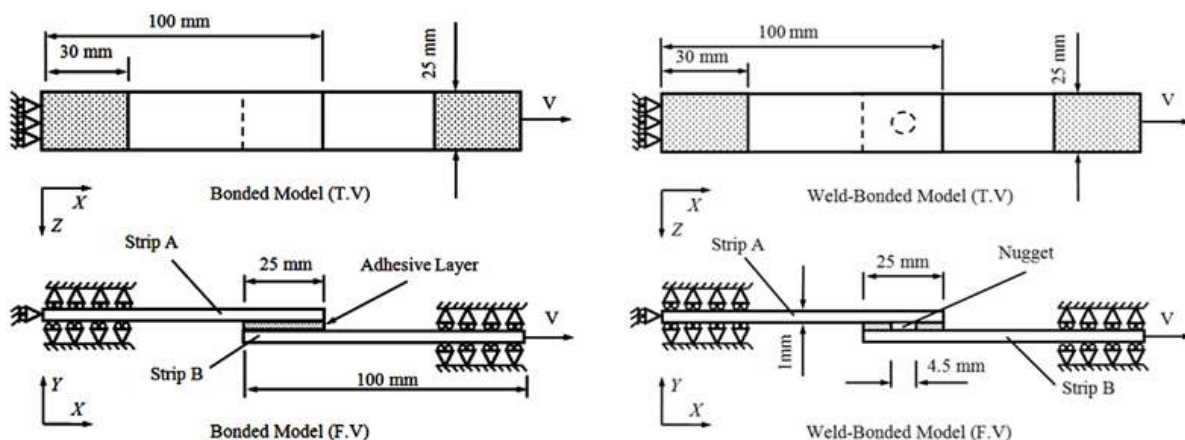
Finite-element configurations for the bonded and weld-bonded joints
